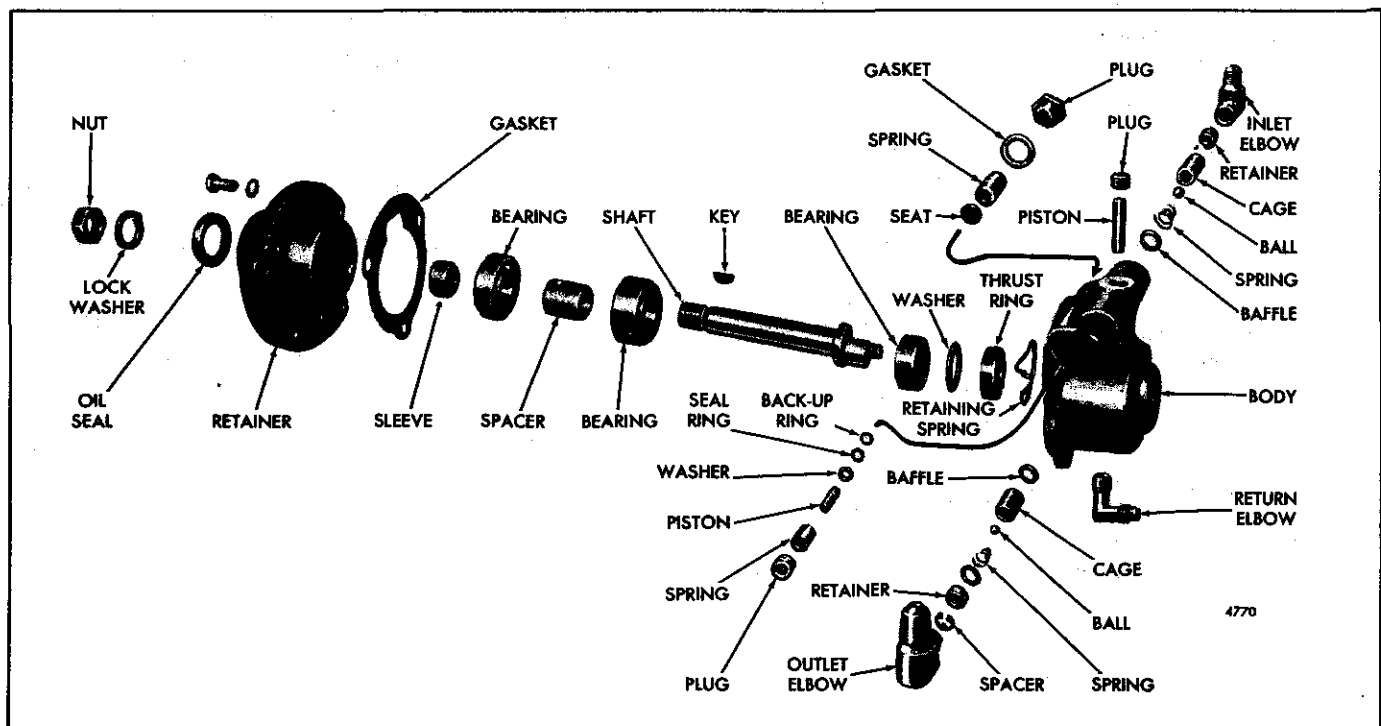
Belt-Driven Charging Pump Details and Relative Location of Parts
